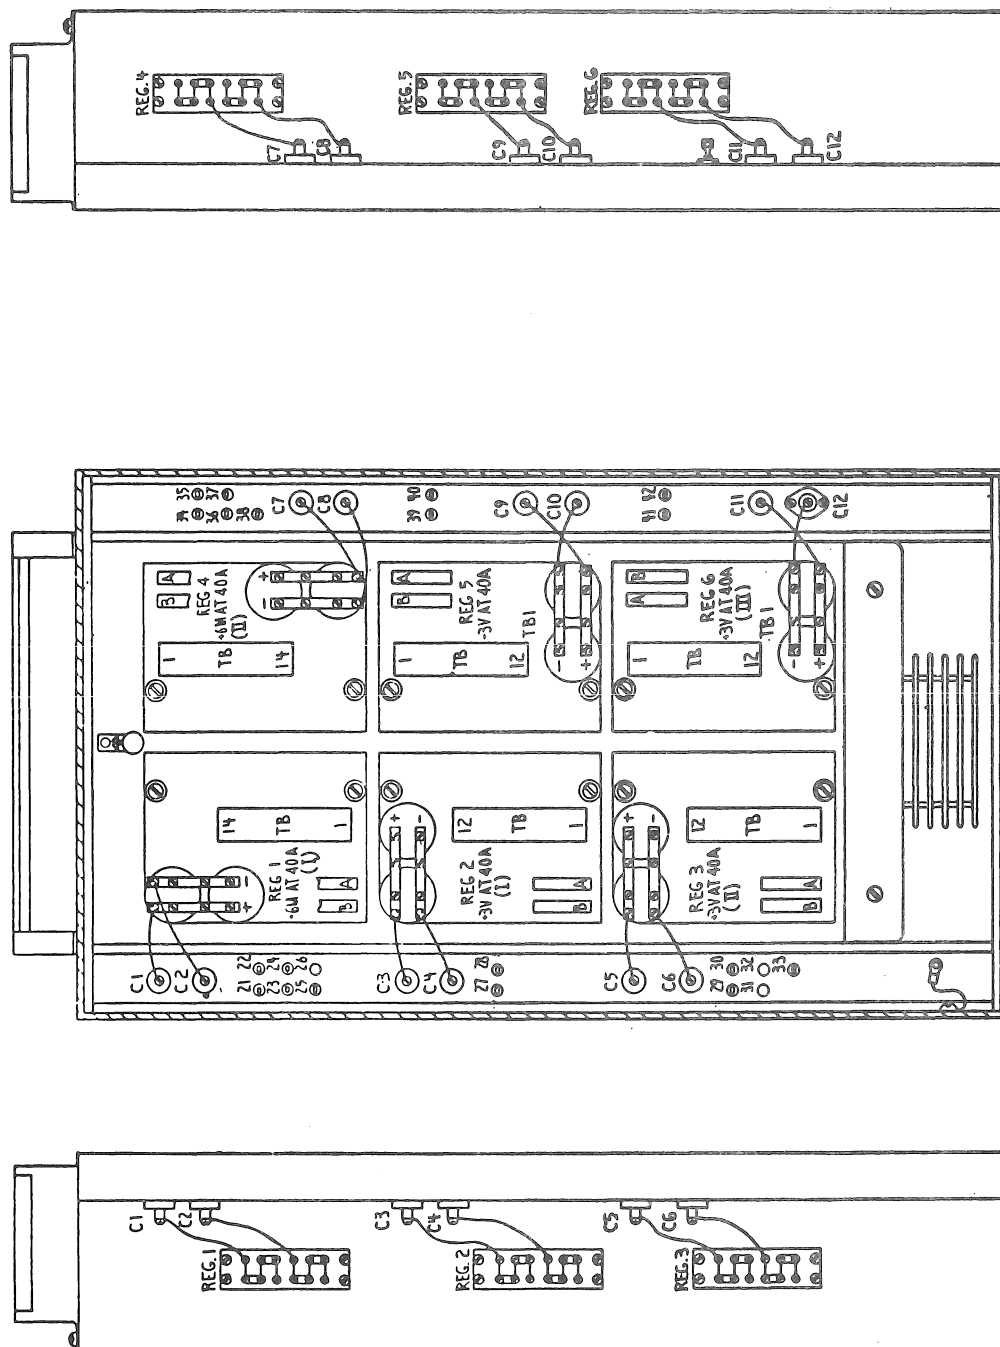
Power Supply and Regulator 1-6 Layout.
